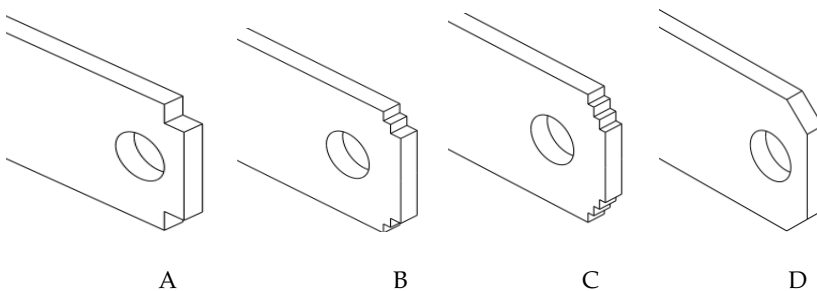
Four types of hammer used for testing (A – one step hammer; B – two steps hammer; C- three steps hammer; D – triangle hammer)
